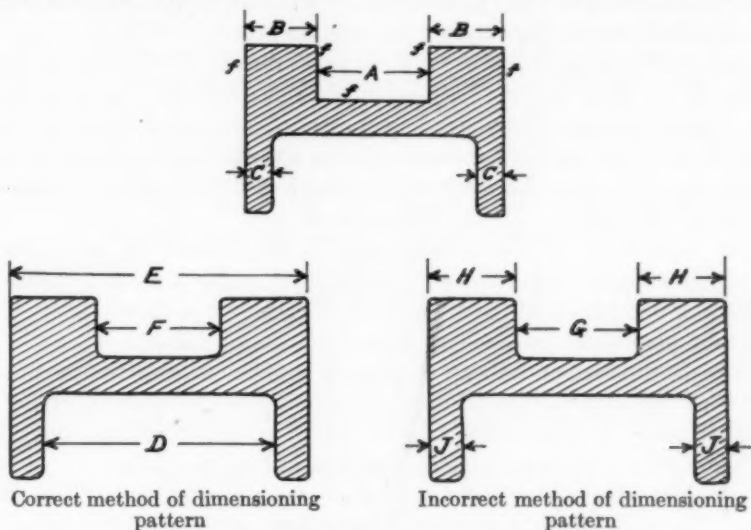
ARRANGEMENT OF PATTERN DIMENSIONS
